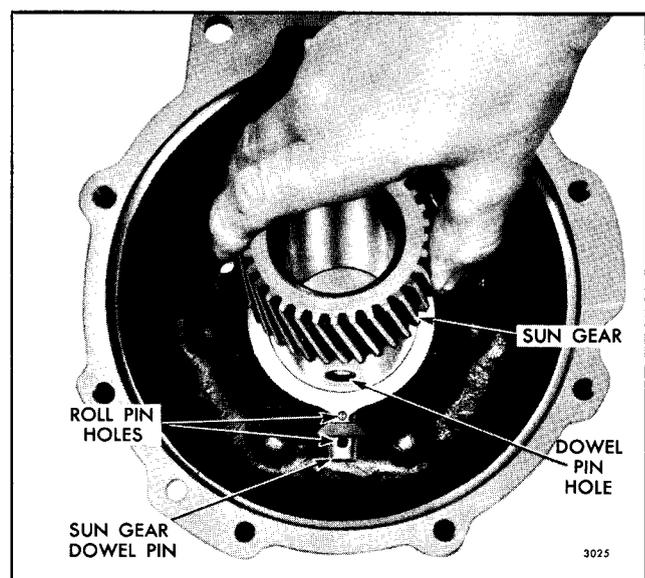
Installing Sun Gear in Reduction Gear Housing (1.5:1 Ratio)
